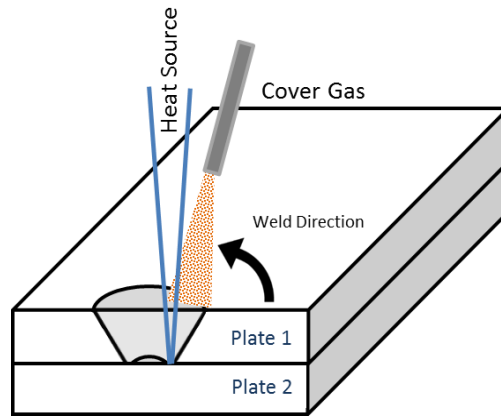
Schematic of Laser Welding Process. All samples were welded through a 45° countersunk hole in order to have full penetration through both plates.
